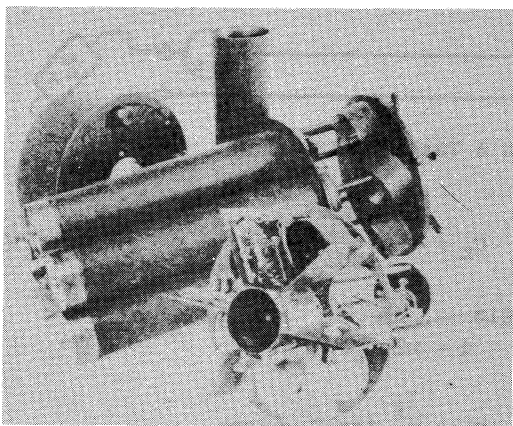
THE CONCENTRIC LINE RECEIVER SHOWING METHOD OF ASSEMBLY.
